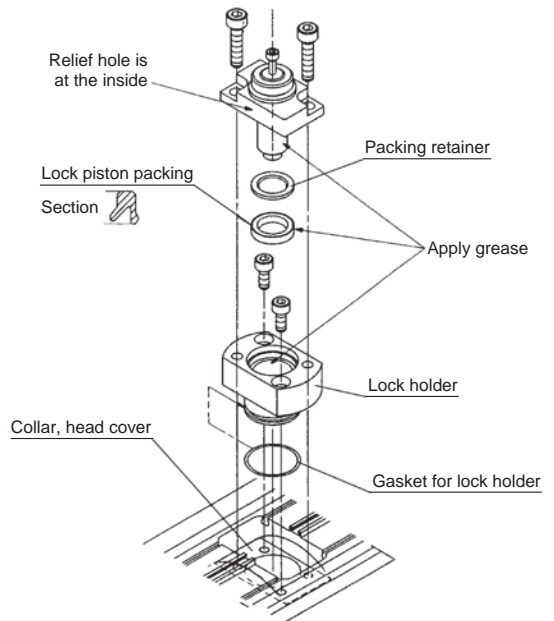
Reassembling of end lock part (ø20, ø25)
